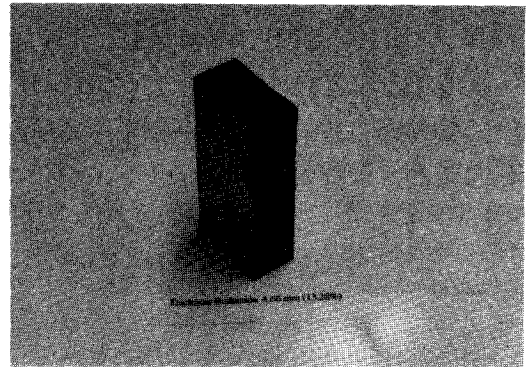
Perspective view of the ring specimen segment cut in the radial direction at T.R. (Thickness reduction)=13.28%.
